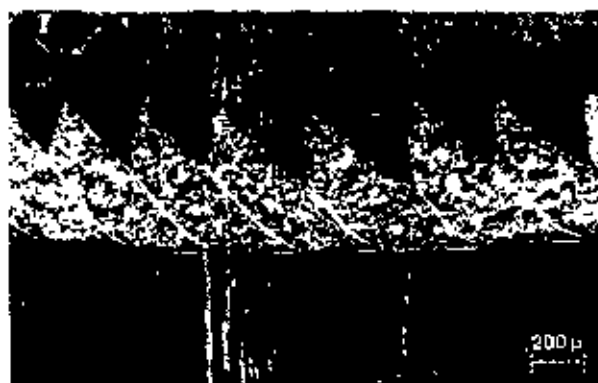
Saw-toothed chip produced by hard turning [14]
